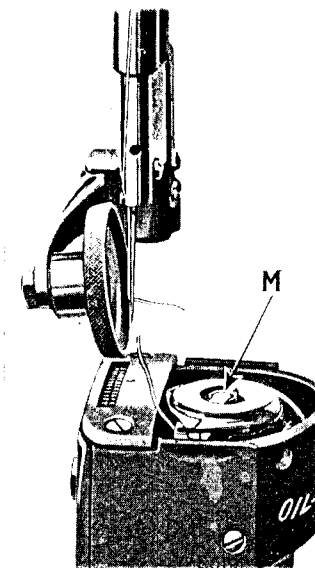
BOBBIN CASE CAP THREADED AND REPLACED
